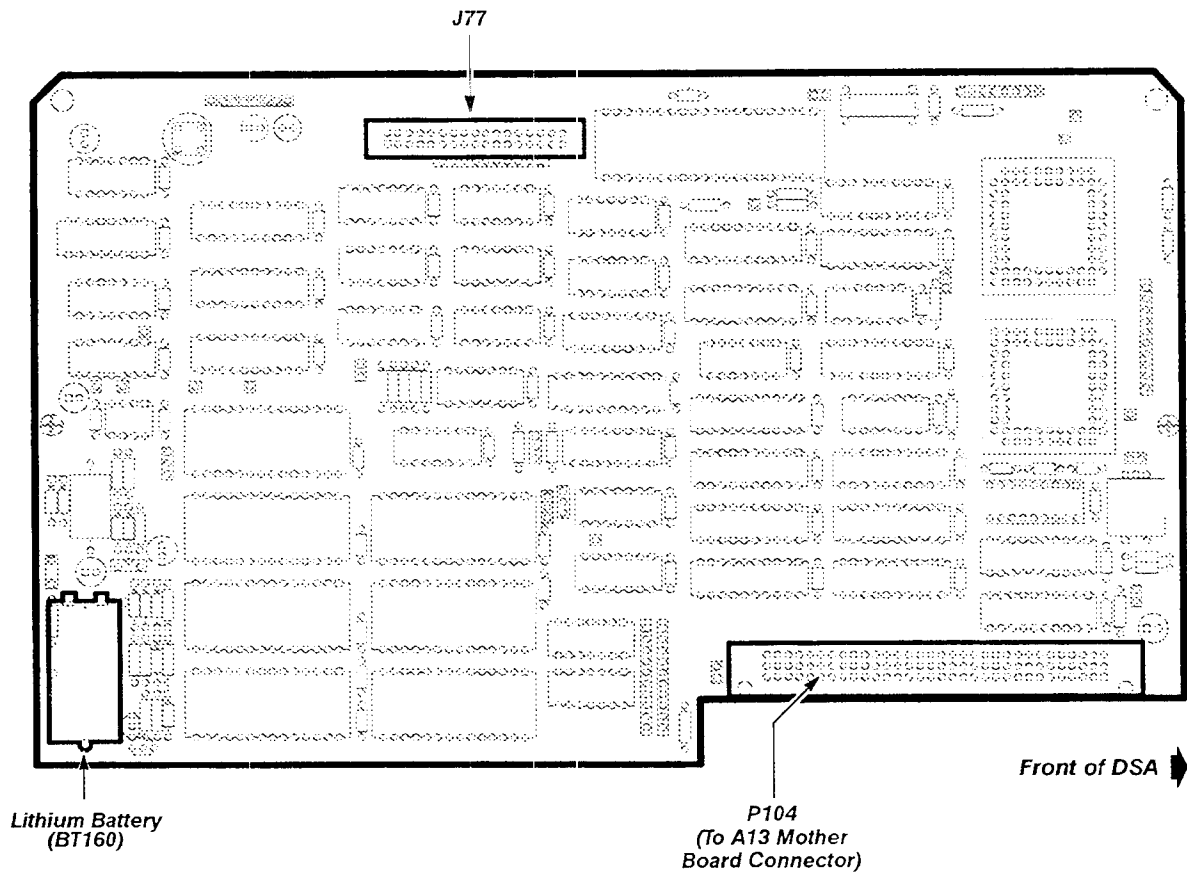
Removing/Replacing the A17 Main Processor Board
